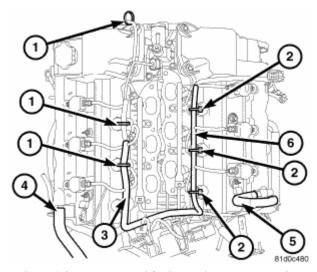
Identifying 2.7L Engine Wiring Harness Courtesy of CHRYSLER LLC
